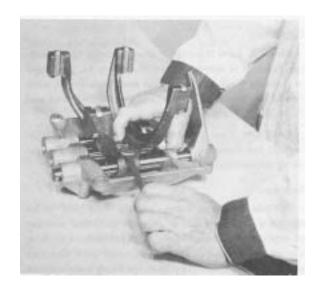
Remove 1st & Reverse shift lug lockscrew.
